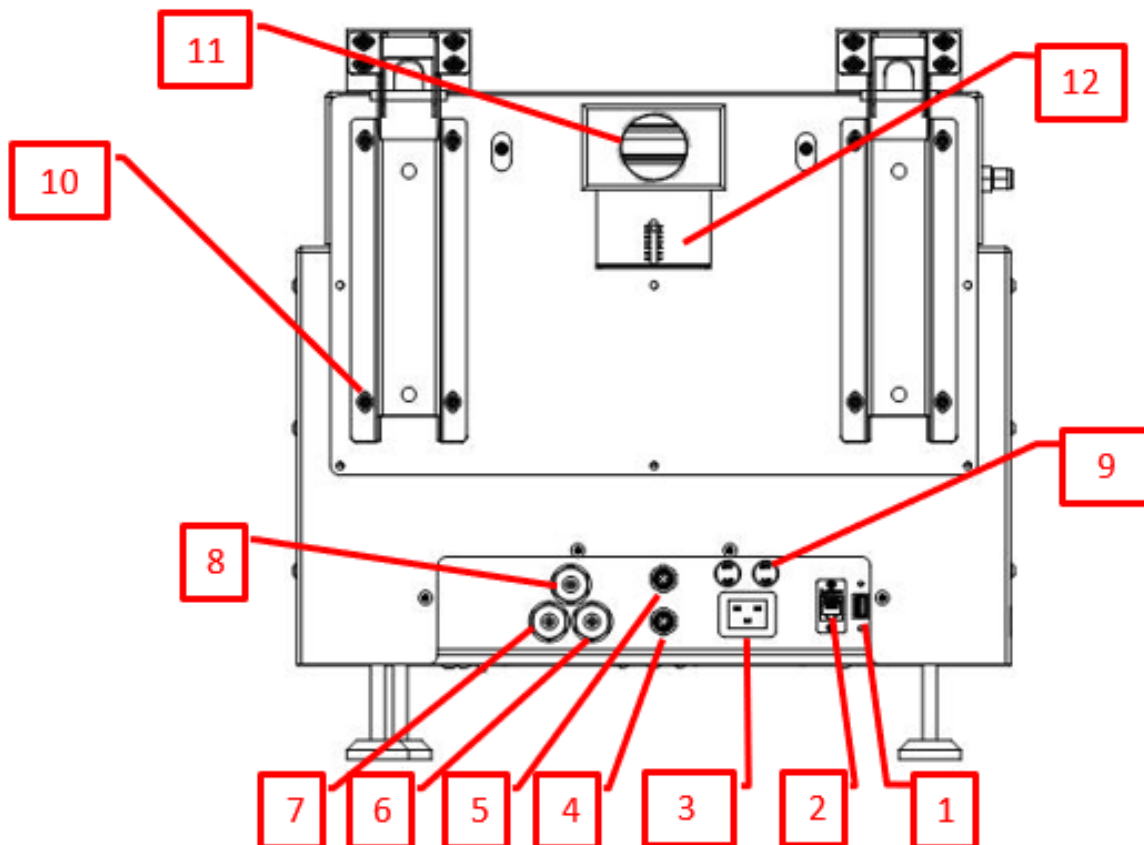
Apogee™ 300 Bake Plate Facilities Connections
